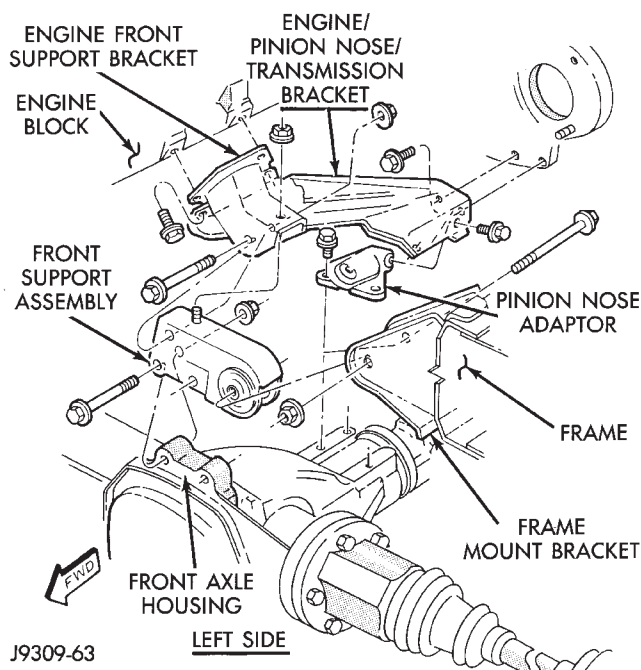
Engine and Axle Front Support—4WD Vehicles
